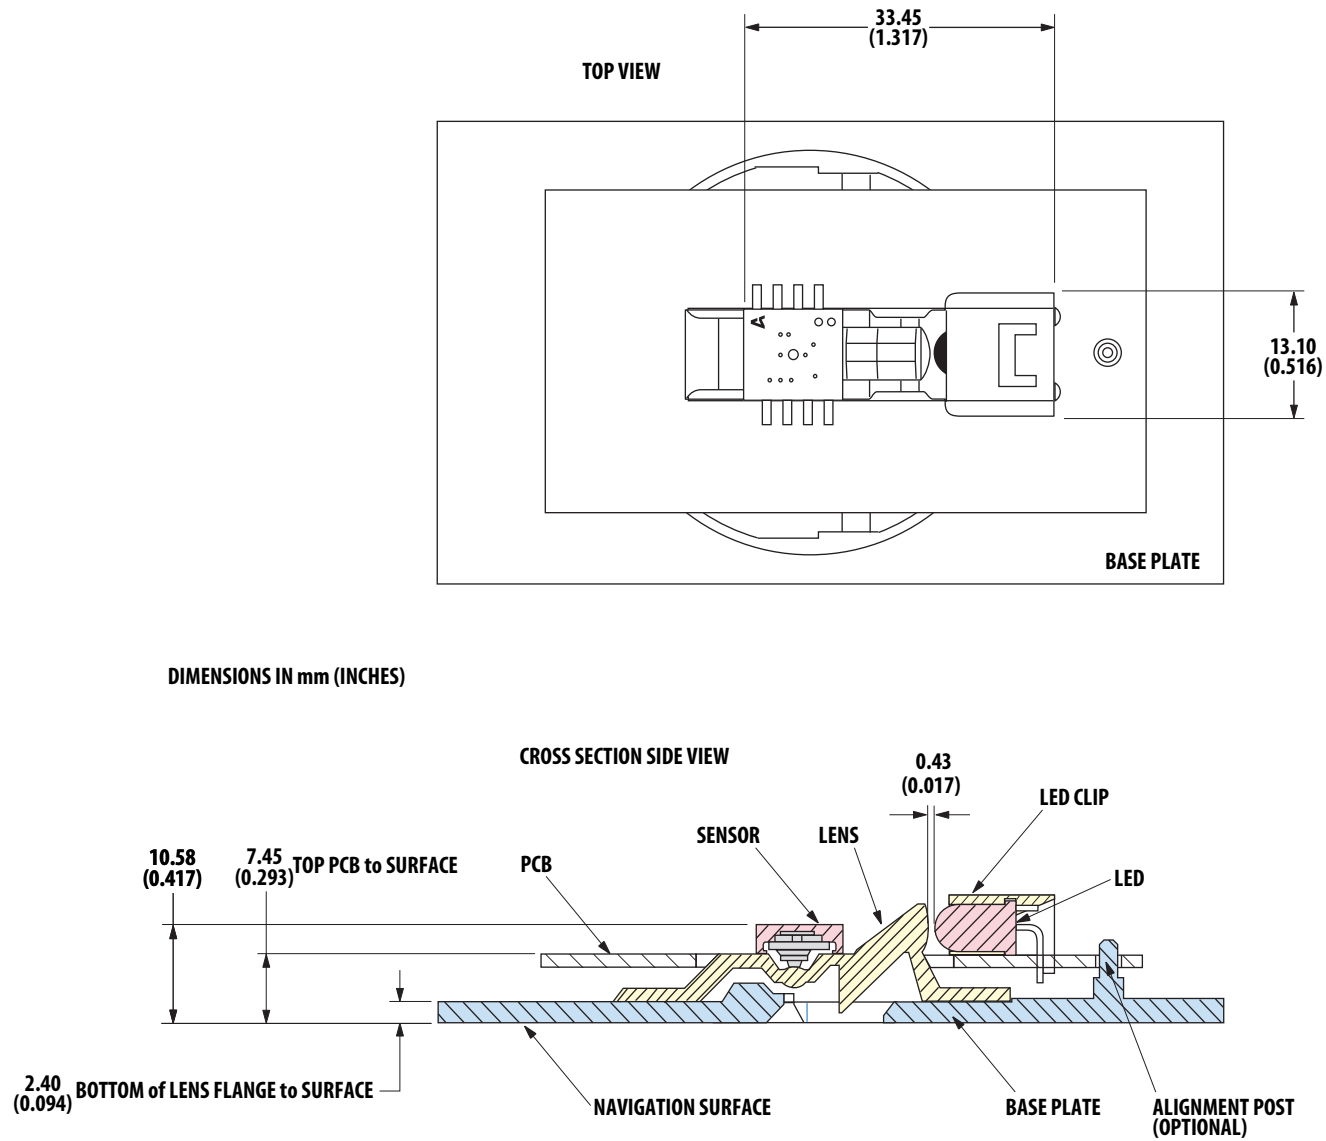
2D Assembly drawing of ADNS-5050 (top and side views).
